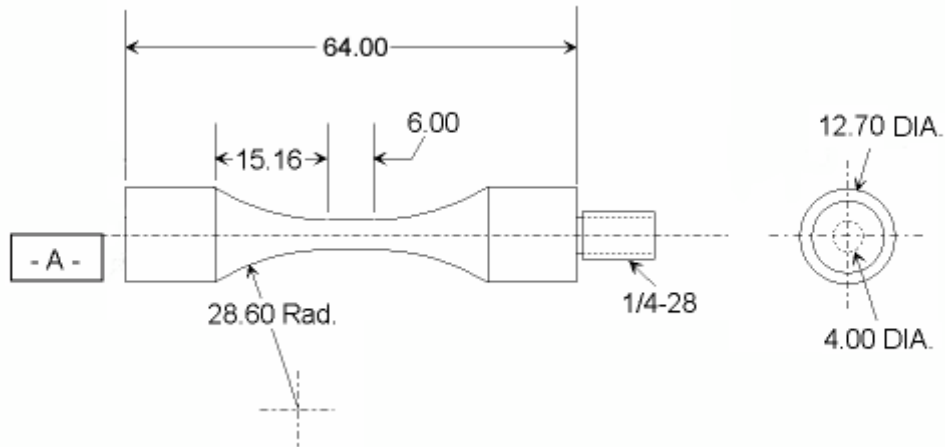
Ultrasonic Fatigue Specimen (all dimensions shown in mm).
